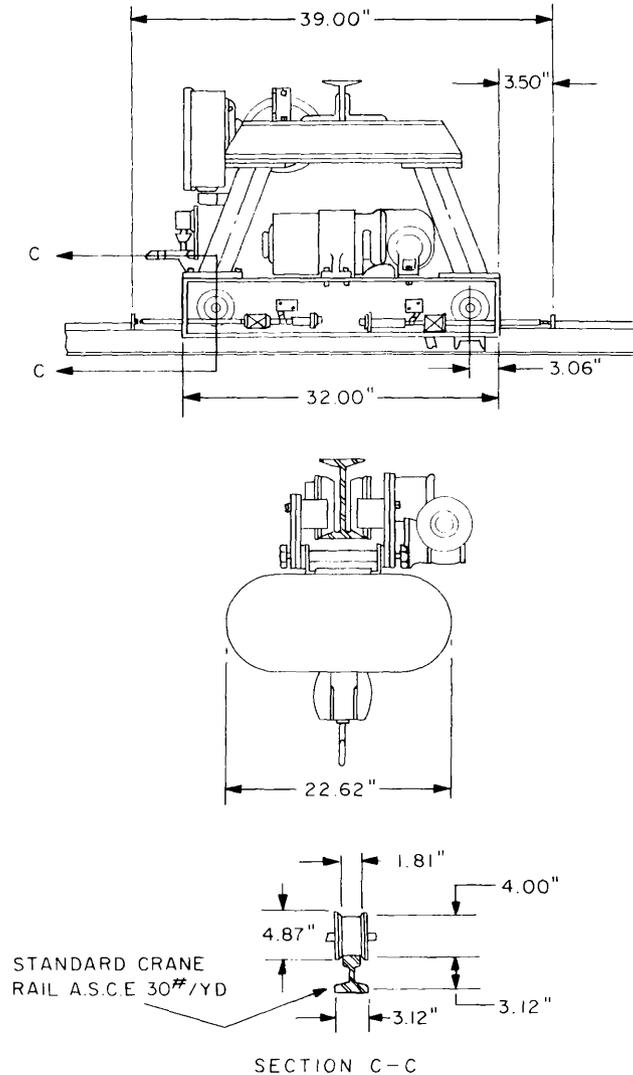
Sketches showing "A" frame end supports, bridge I-beam and trolley, and bridge wheel detail
